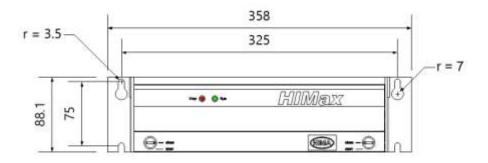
Dimension Drawing for System Fans 10 01 and 10 03
